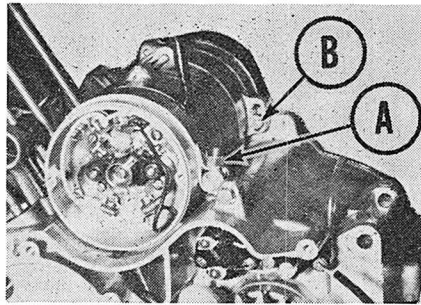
Alternator clamp nut (A) and lock screw (B) are accessible after removing air cleaner.
